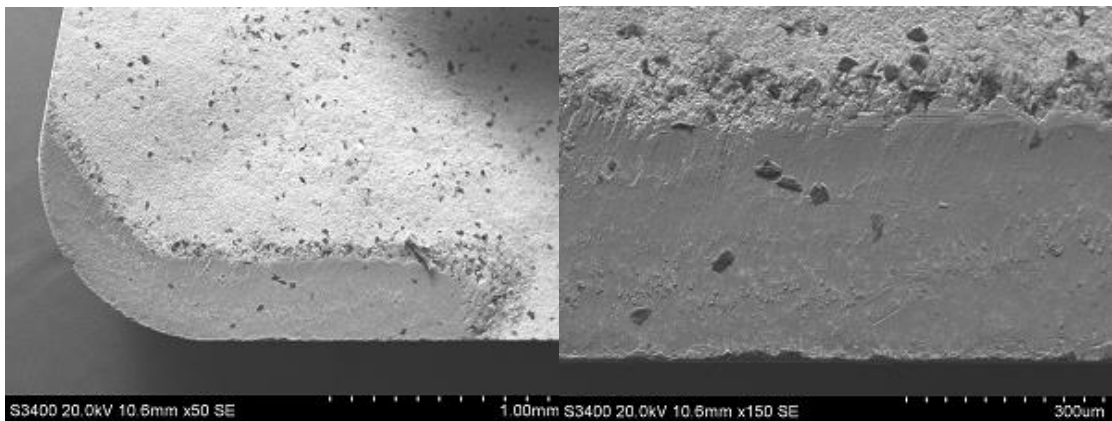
SEM images of cutting tool when cutting speed is 30m/min and feed rate is 0.30 mm/rev (left) and amplified part (right) after machining 10 cm<sup>3</sup>
